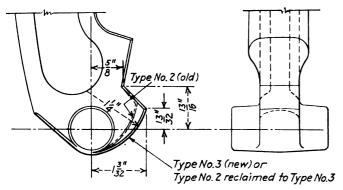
A.A.R. Type D coupler top lock lifters, new No. 3 type and reclaimed No. 2 type
